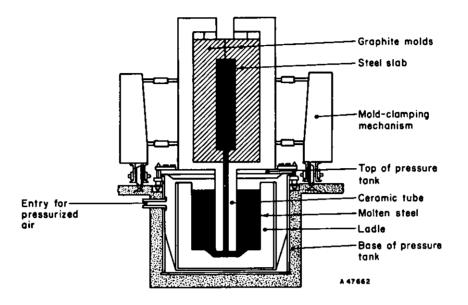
INSTALLATION FOR PRESSURE CASTING A SLAB
